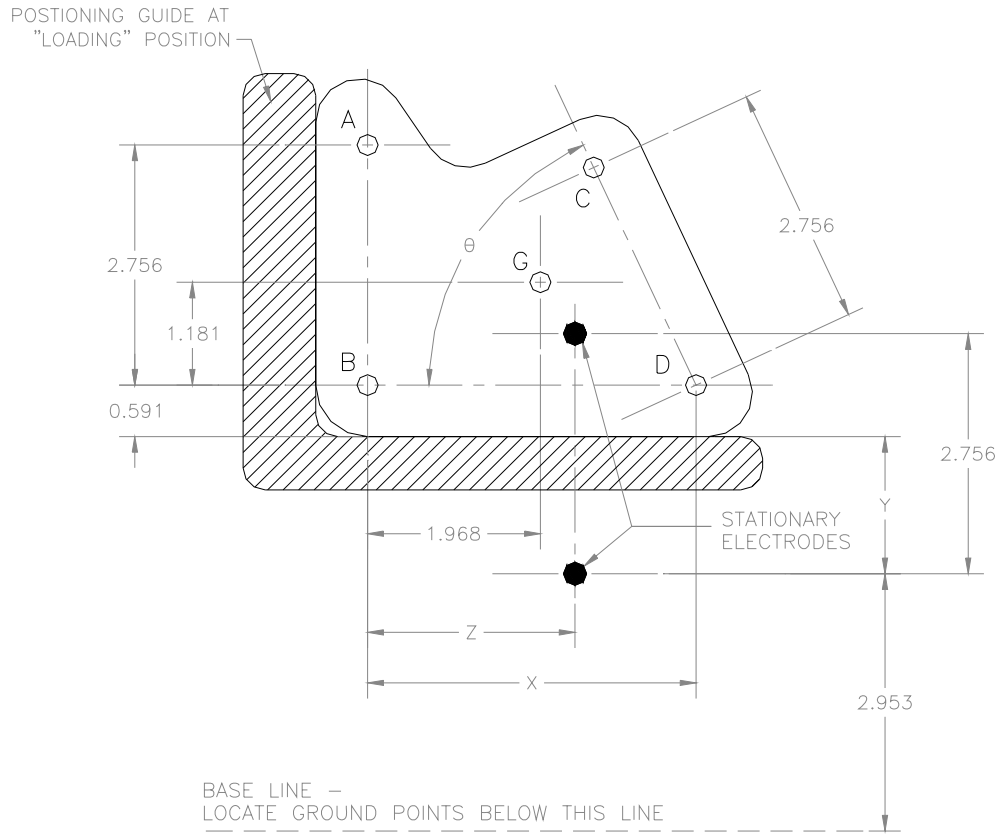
Project layout requirements – part is in the “loading” position (dimensions are in inches)
